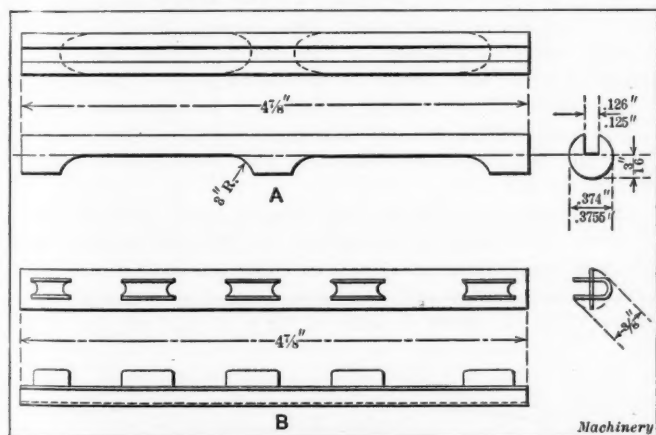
(A) Slotted Rod for Hollow Shaft shown at A, Fig. 1; (B) New Method of producing Part to replace Solid Rod A
